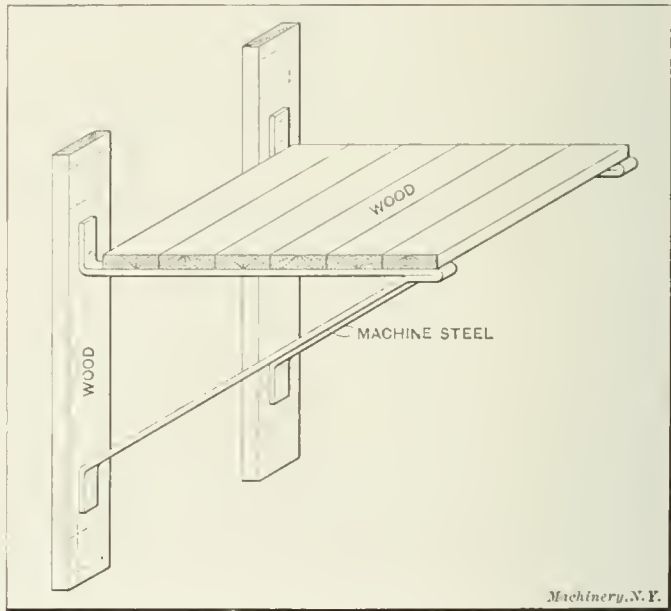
Bracket for Brick Wall made of Bar Machine Steel and Wood, for Heavy Motors
